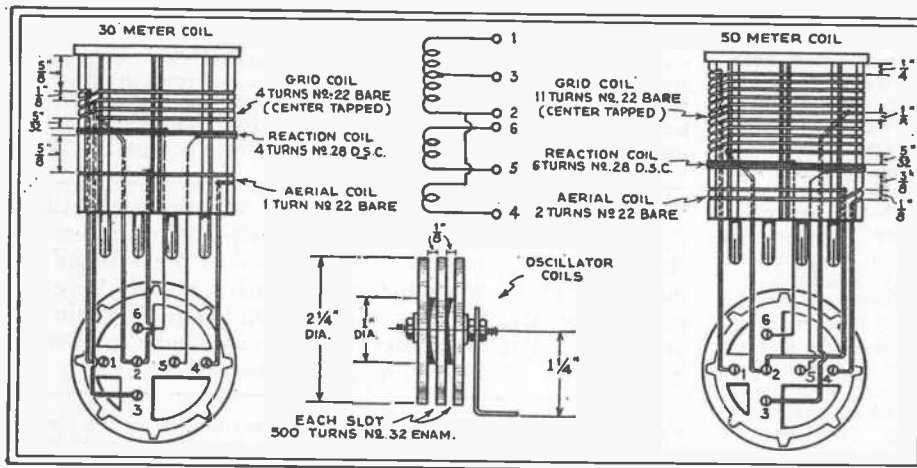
Details of coils and winding data, also dimensions of wooden form for quenching oscillator coils.
